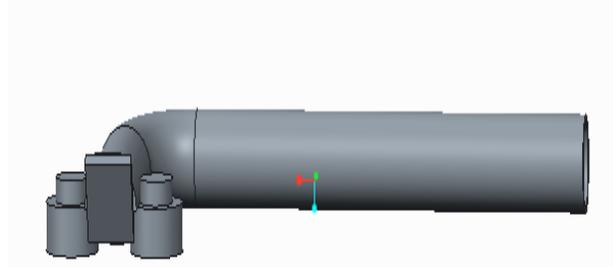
Pro-e Model of Spring Loaded Cap Dispenser
